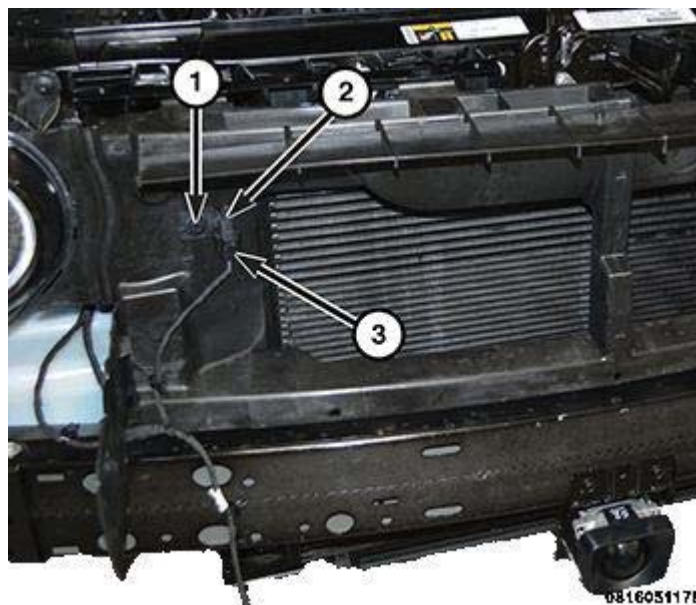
Ambient Air Temperature Sensor, Wire Harness Connector & Retainer
